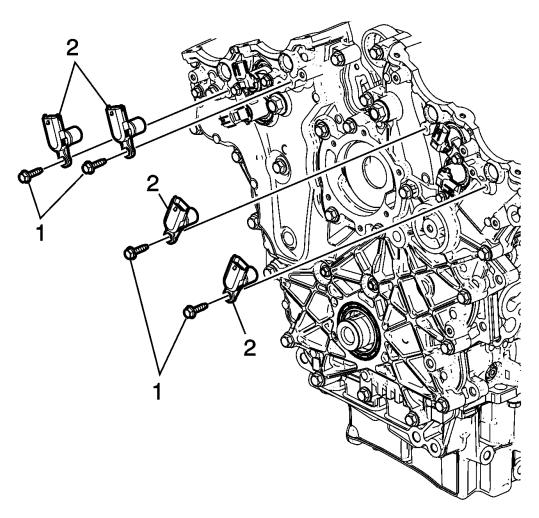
Placing Camshaft Position Sensors Courtesy of GENERAL MOTORS COMPANY
